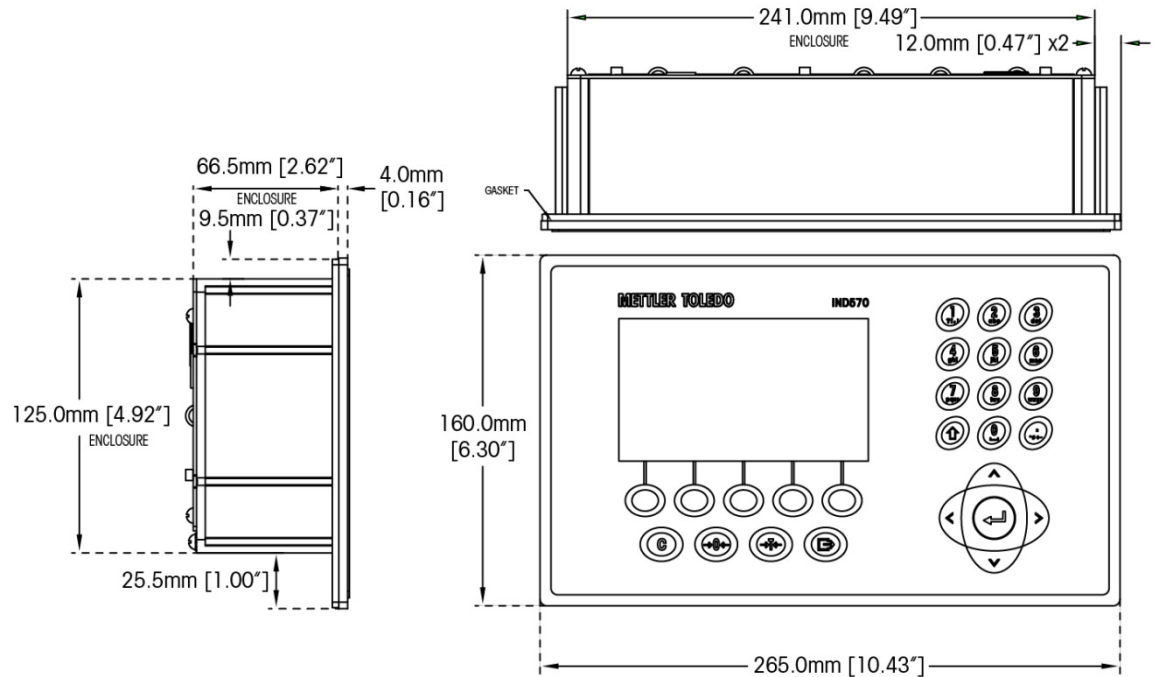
IND570 Panel Mount Enclosure Dimensions
